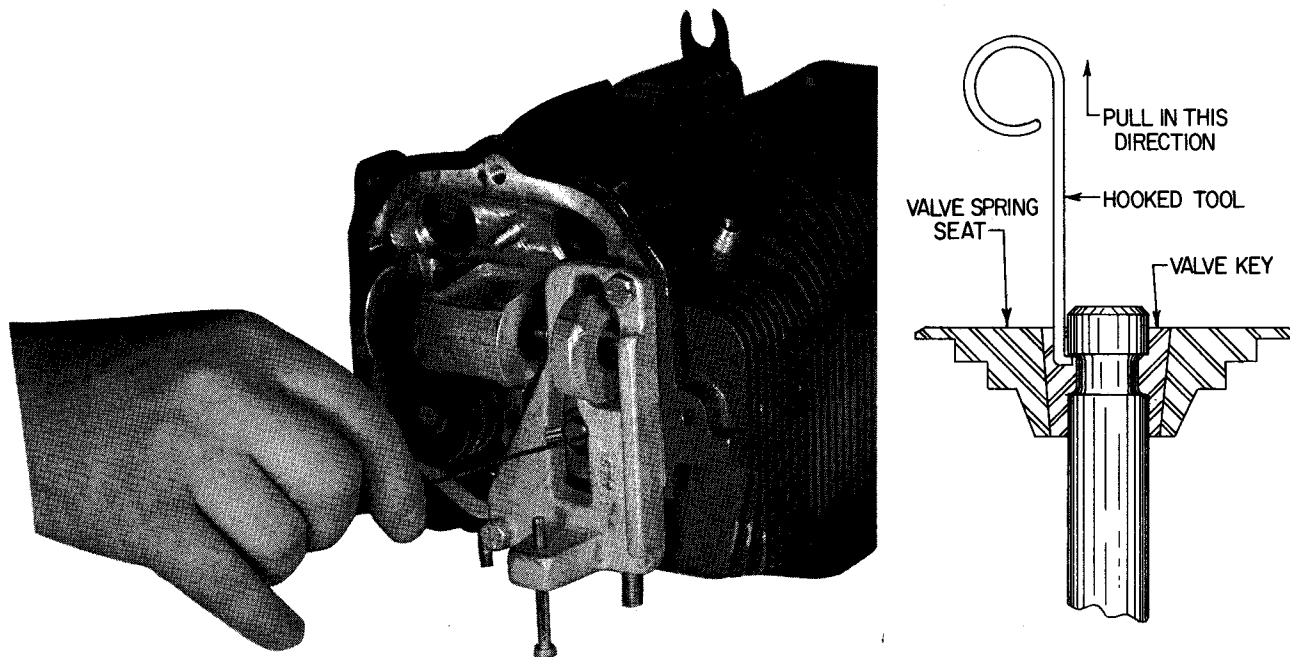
Method of Using Hooked Wire Tool to Pull Valve (Solid Stem) in Position for Removal of Keys
